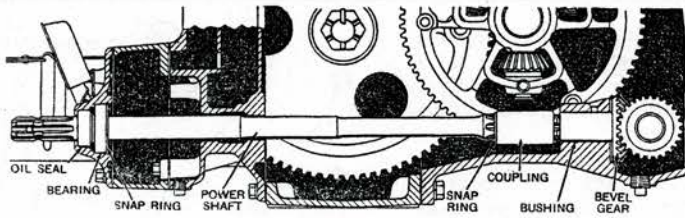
A Cutaway view of Model 60 transmission-driven power shaft. Model 50 is similar
